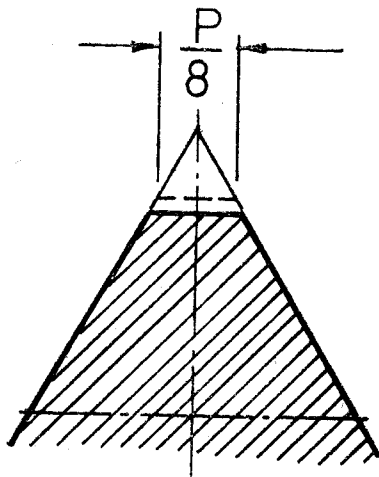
Crest produced by grinding with a single-ribbed wheel or cutting with a single point tool.
